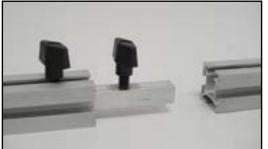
Detail A: Most horizontal extrusion connections have a patented expandable lock. This lock inserts into the groove of an opposing extrusion. Tightening the lock with the Hex Key Tool expands the lock and creates a strong positive connection.
